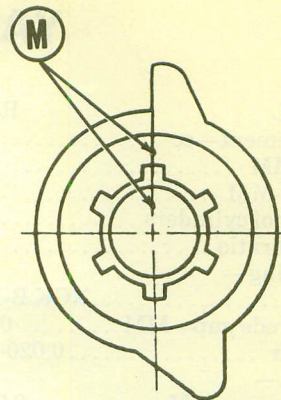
Align marks (M) on ratchet (14—Fig. Y8-20) and shaft (9) when assembling.
